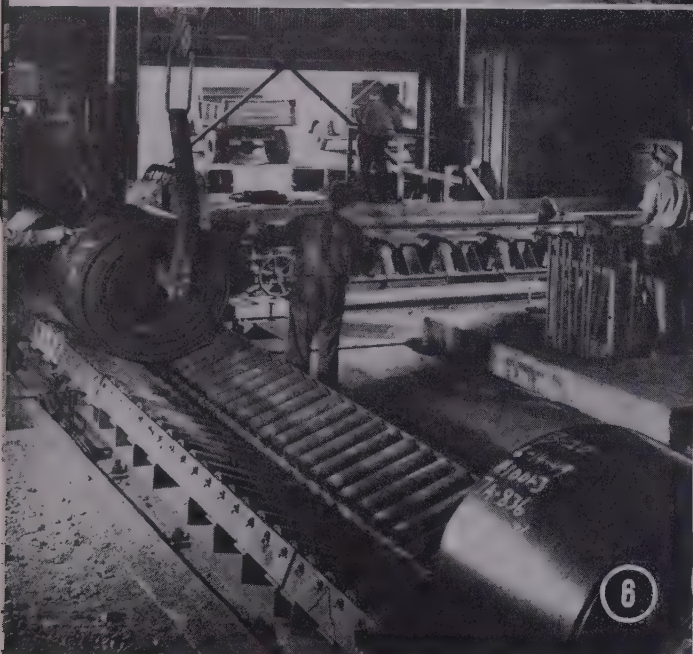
Mandrel-type tight up-coiler and conveyor for removing finished coils to storage or to the flattener and cut-up line
